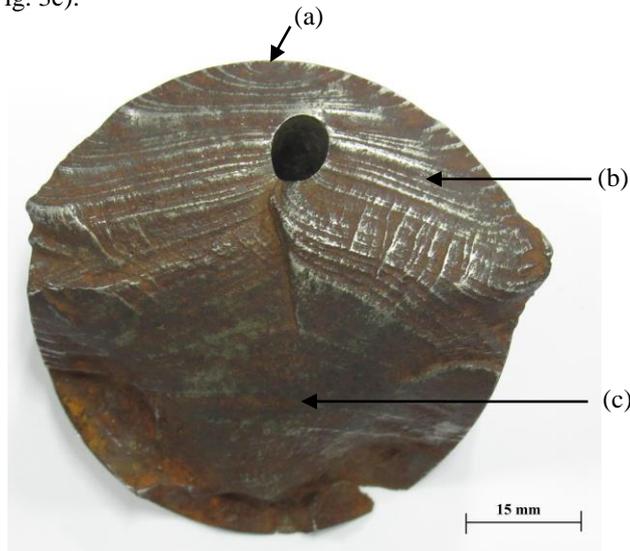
Representation of the fracture surface of the crankshaft in analysis. We can observe perfectly the three zones: nucleation in (a), propagation in (b) and final fracture in (c). Source: Authors (2019)
